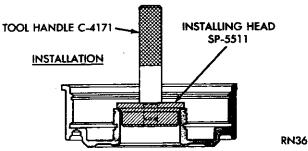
Replacing Front Clutch Retainer Bushing—A-727
